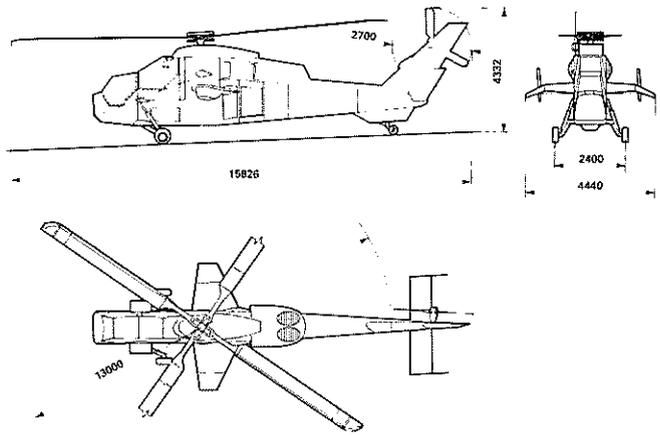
THREE-VIEW DRAWING (BASIC HELICOPTER)
